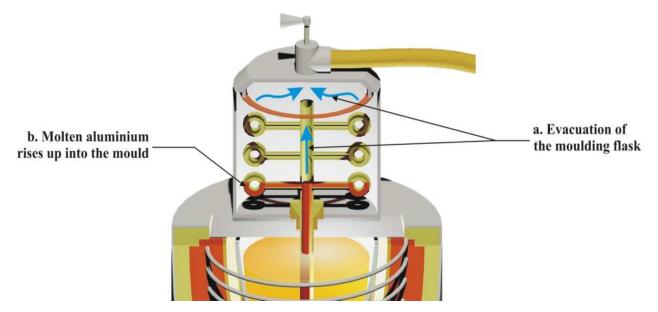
The evacuation of the moulding flask (a) also evacuates the investment mould cavity. This causes molten aluminium to rise up into the mould cavity (b)
